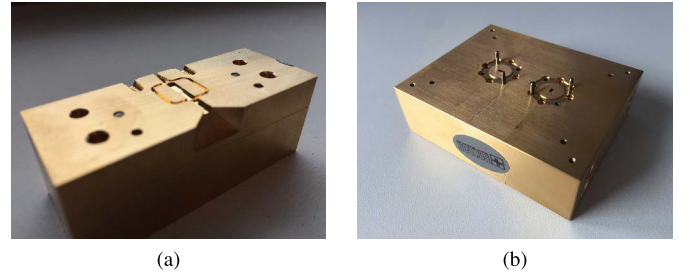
Picture of a (a) single fabricated part of the OMT and (b) entirely assembled OMT block existing of four parts.
